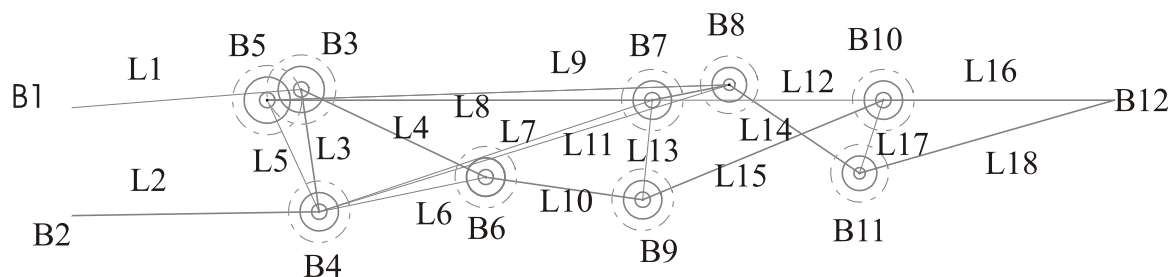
Linkage and Bearing geometry of the Canterbury Finger
